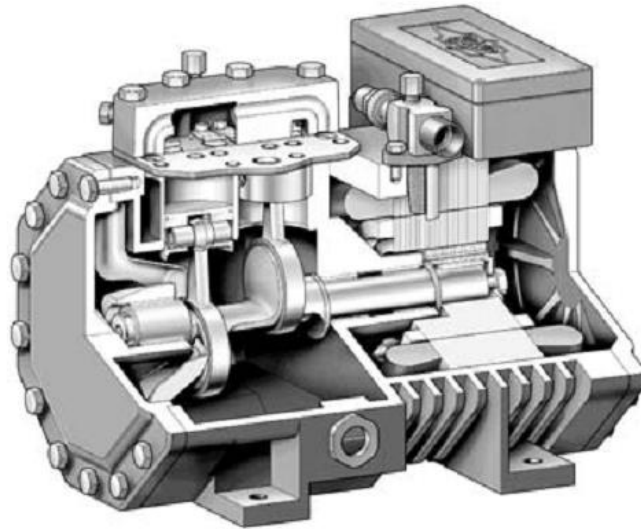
Section view of a semi – hermetic reciprocating compressor
